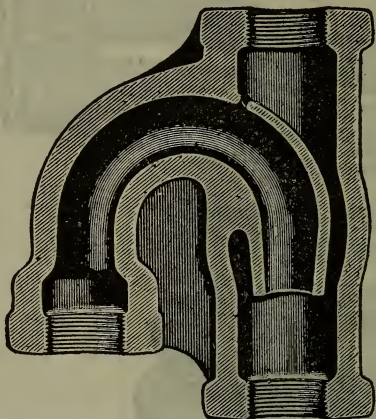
B. SECTIONAL VIEW DUPLEX COILS.
